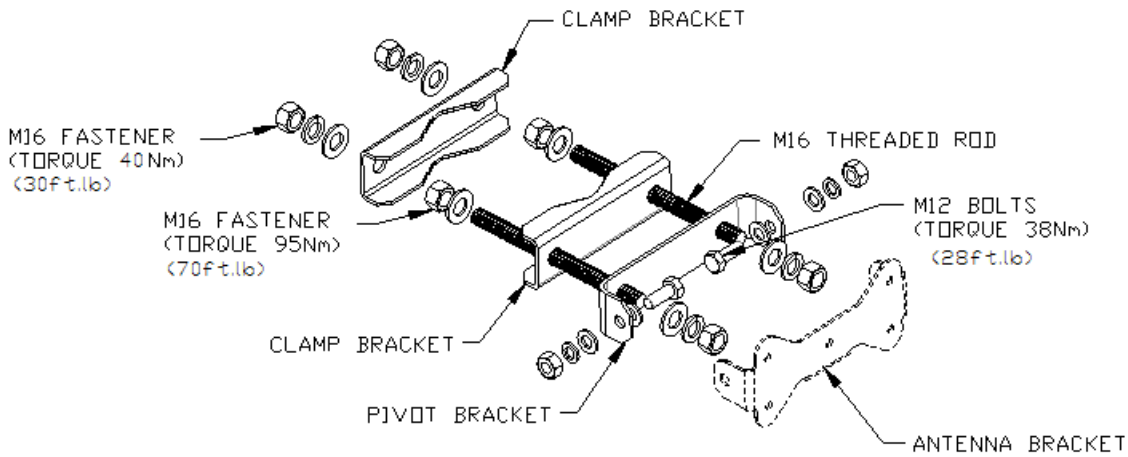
Exploded Assembly for Lower Mounting Bracket using Clamp Bracket
